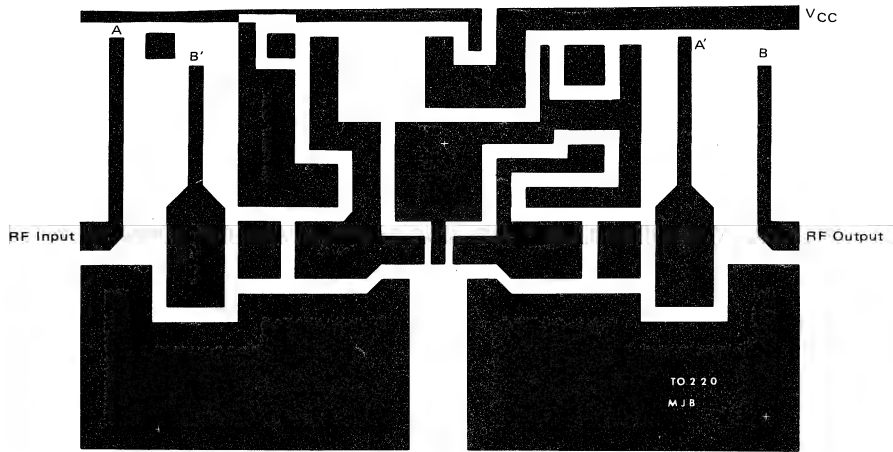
TEST AMPLIFIER PCB PHOTOMASTER
